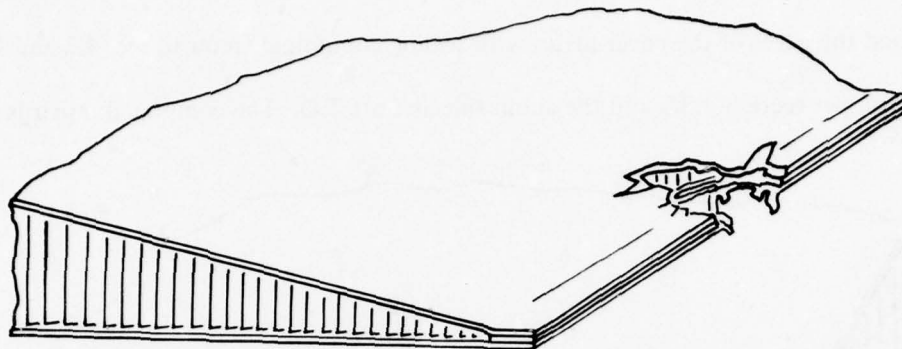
Typical Damage to Laminated Trailing Edge
